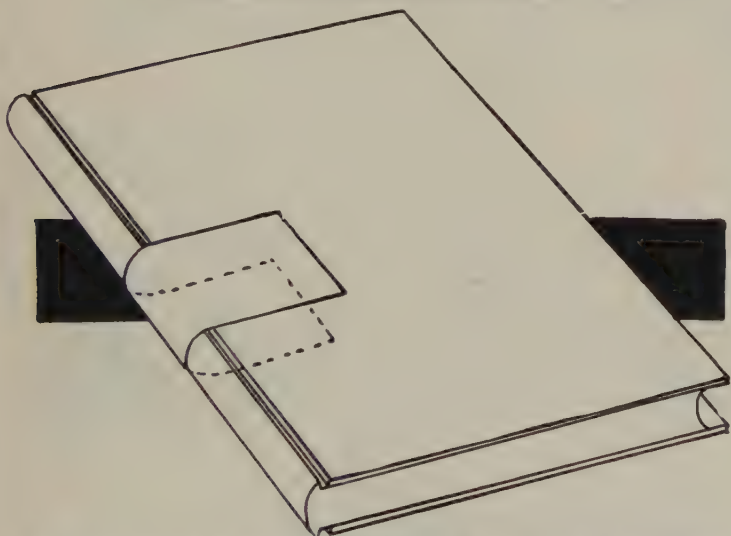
DIAGRAM SHOWING METHOD OF AFFIXING PAPER STRIP TO BOARDS, WHILE THEY ARE IN POSITION ON BOOK, TO DETERMINE PROPER BACKBONE WIDTH FOR COVER
